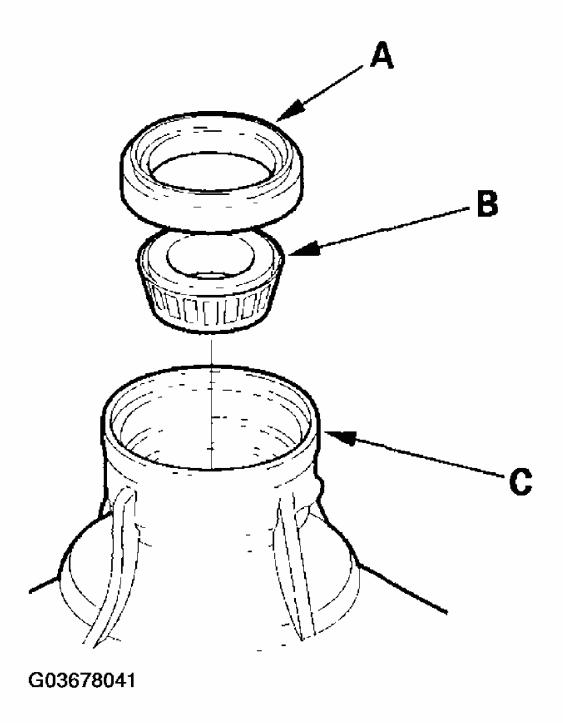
Removing Oil Seal And Tapered Roller Bearing From Transfer Housing Courtesy of AMERICAN HONDA MOTOR CO., INC.
